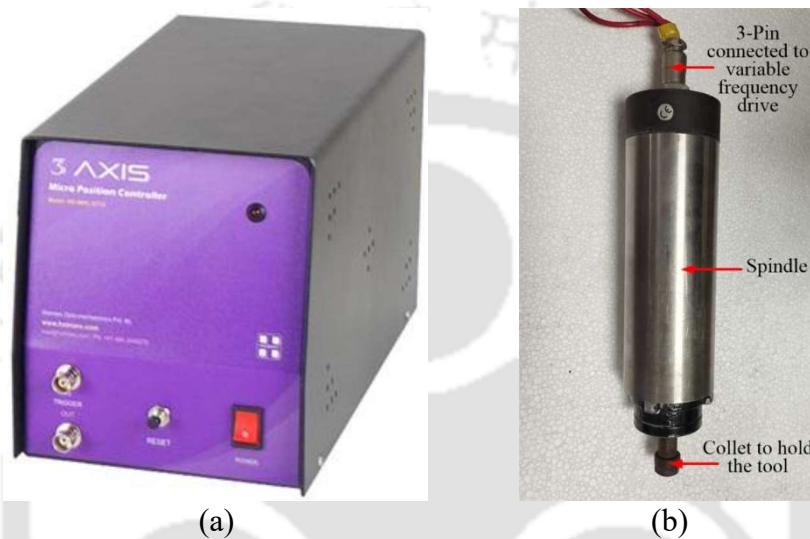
(a) Micro position controller and (b) spindle to rotate microtool
